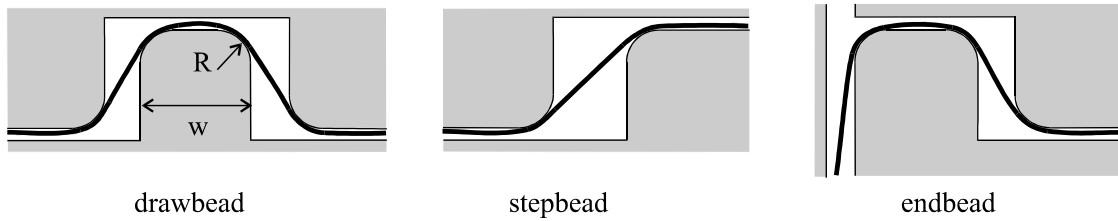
Cross-section of a drawbead, stepbead and endbead
